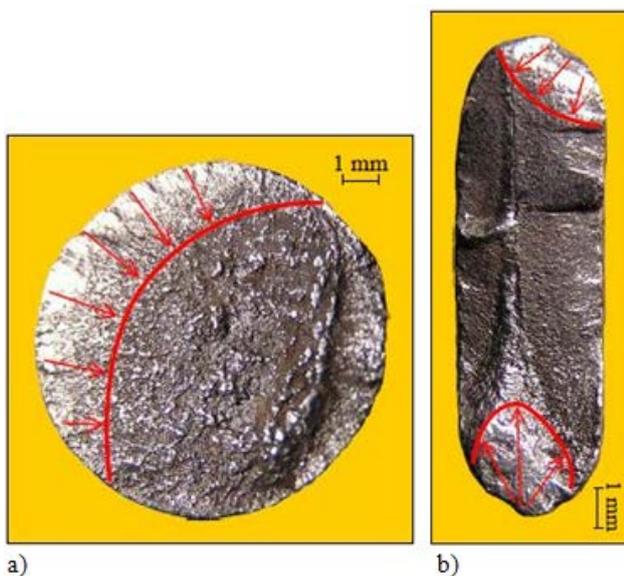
Typical surfaces of fatigue fractures caused by the real load
